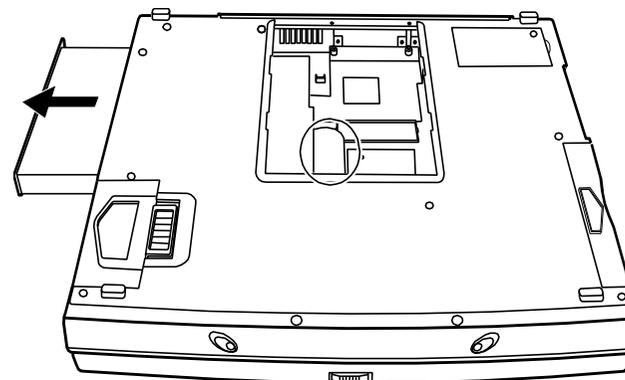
Removing the CD-ROM/DVD-ROM Drive
